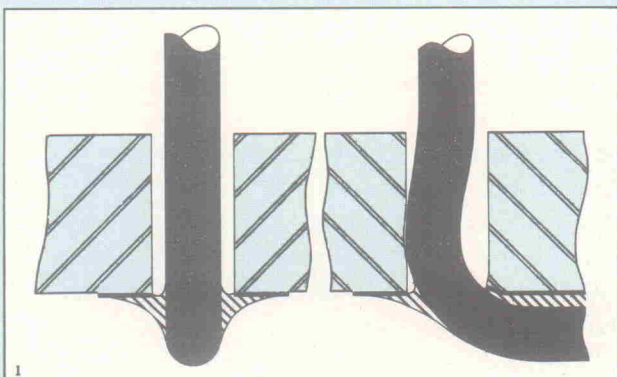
Cross-sections through typical joint on non-plated board (to scale). Note distortions caused by crimping the lead.
